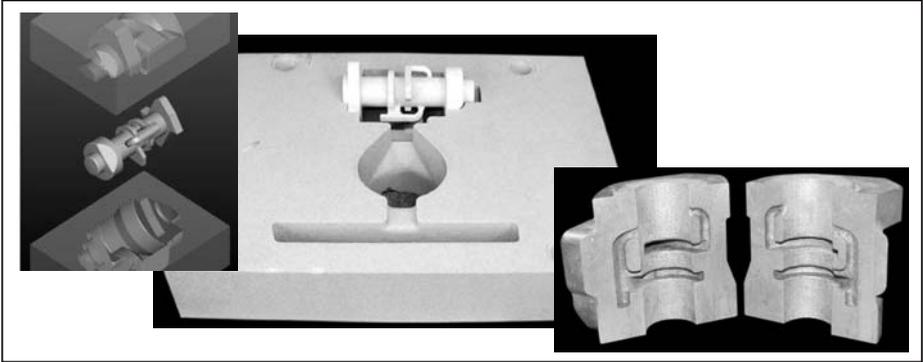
Tooling for sand casting produced with the help of 3D Printing [28]
